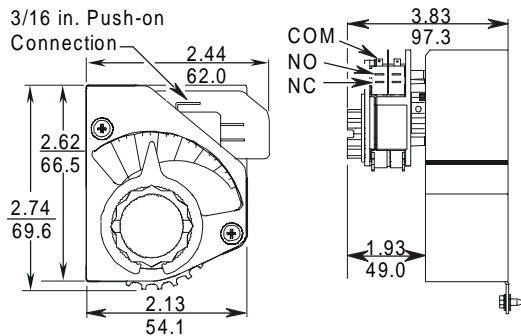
EDA-2040-102 Switch Kit Dimensions, in. (mm)
